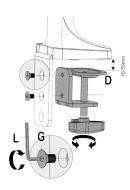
Attach Clamp Mechanism (D) to Angled Bracket (C).
